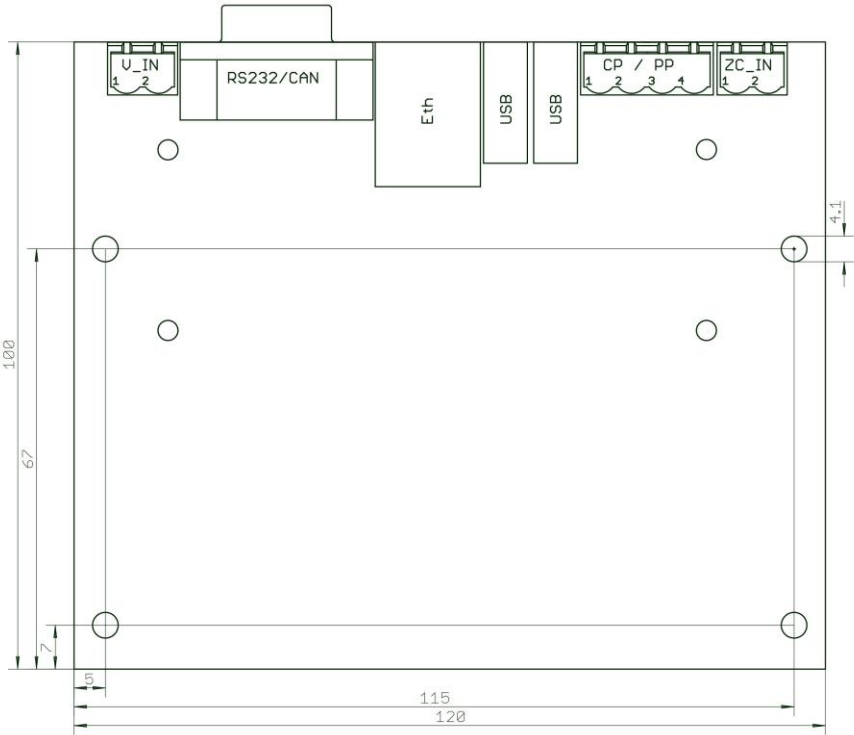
Mechanical Drawing of Charge Control P including Connectors
